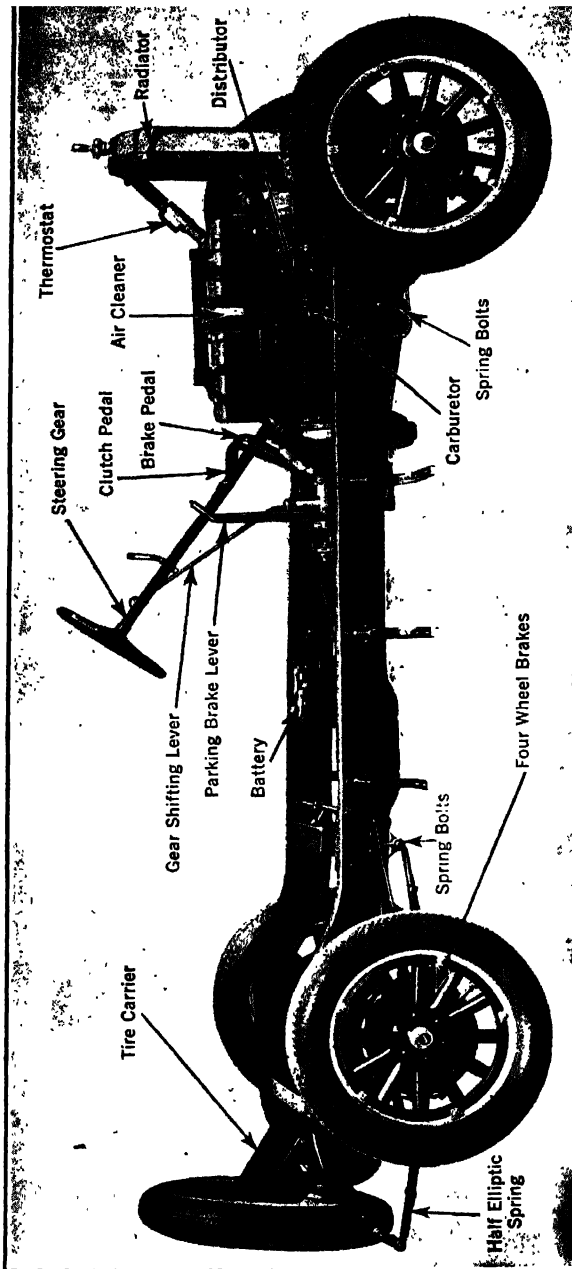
Chassis Using Semi-elliptic Spring. (Oldsmobile.)
